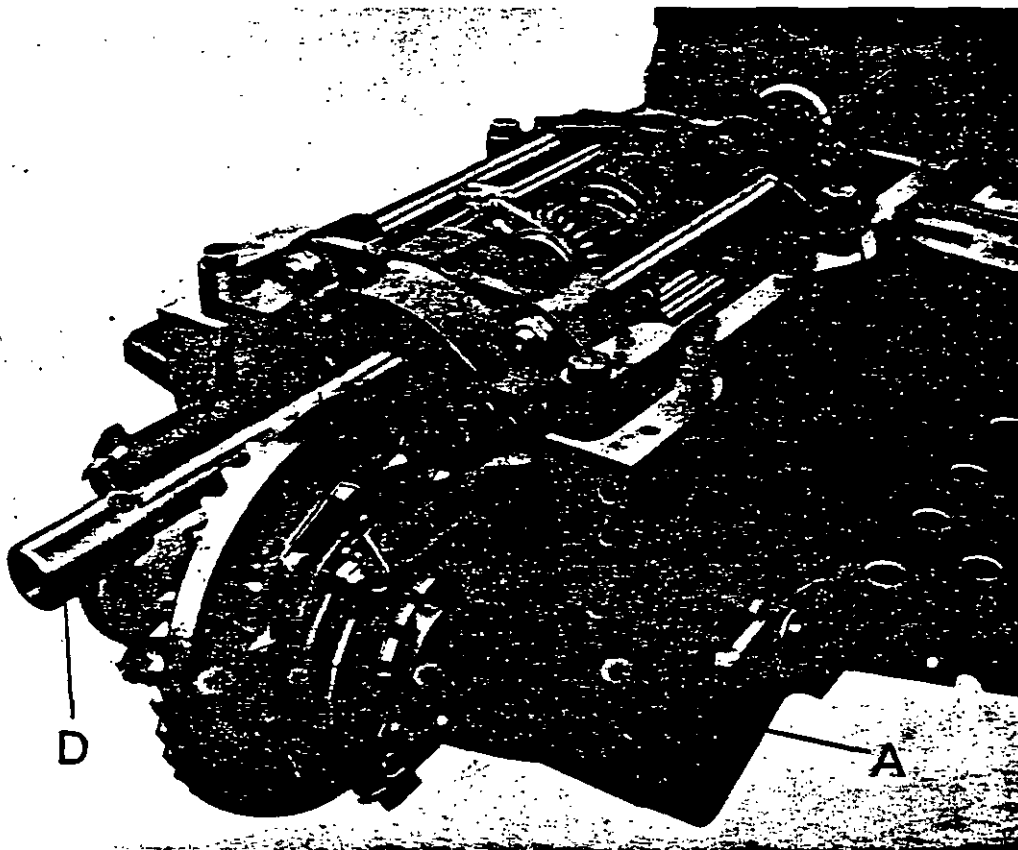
TRACTOR WITH REAR AXLE CASE AND-GEARBOX REMOVED
